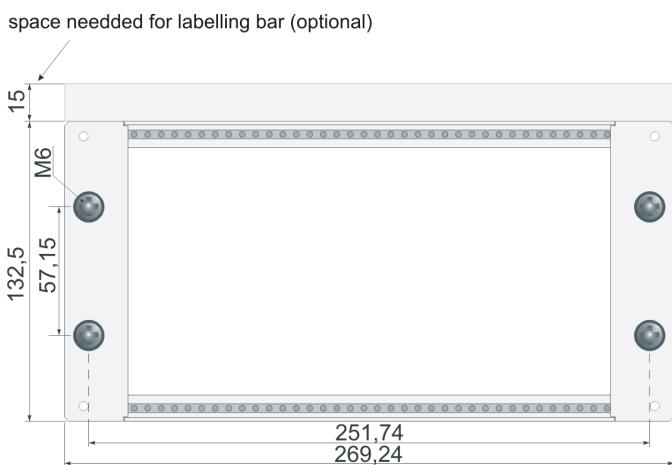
Front view of the board rack, type BGT05, with label bar
